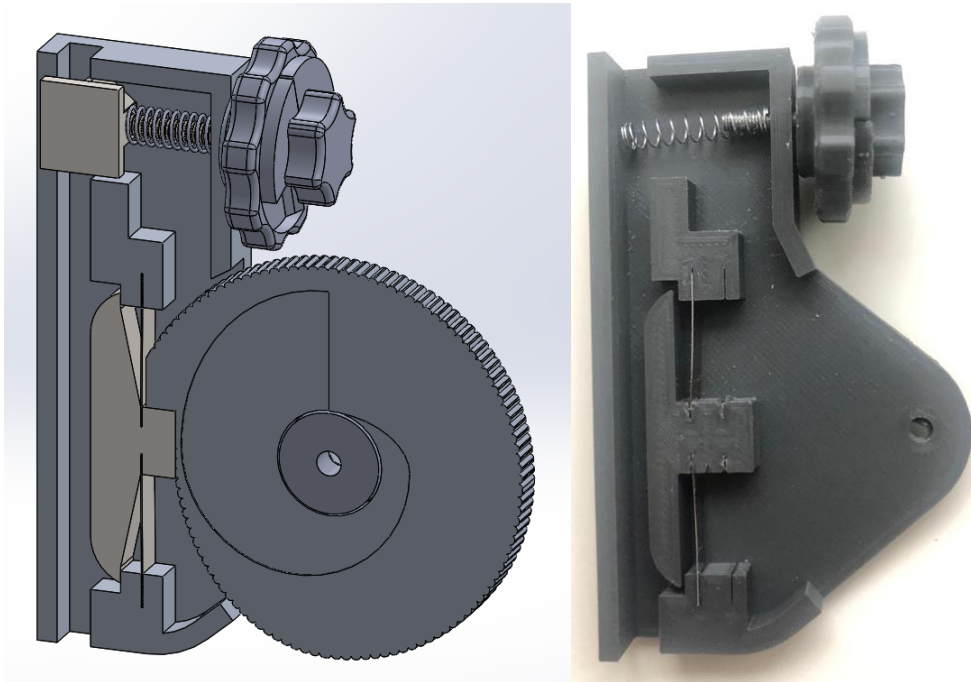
Frontal view of the design v2 CAD model (left) and a part of the prototype (right). Shown without housing cap.
